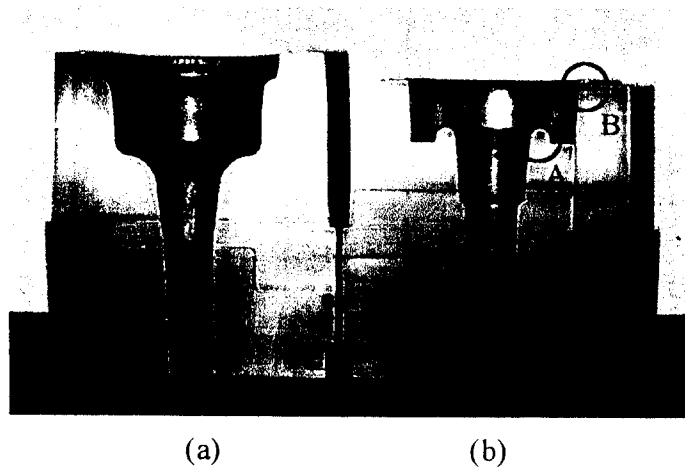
(a) : Blocker die, (b) : Finisher die, 'A','B' : Damaged part
